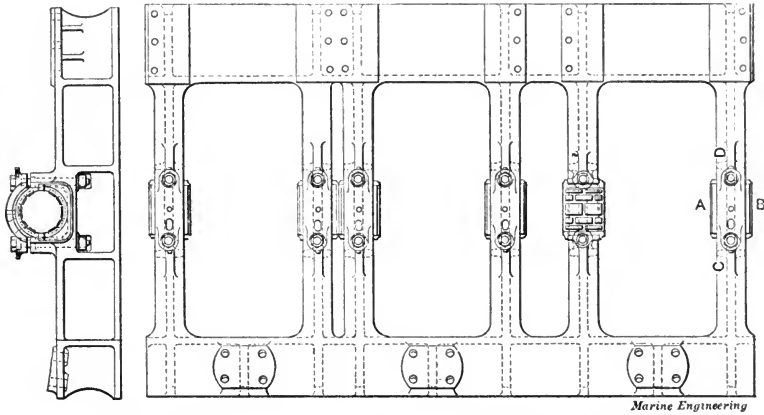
Bedplate for Triple Expansion Engine in one Casting.
